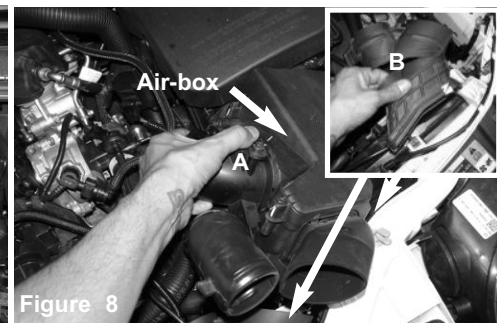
A) Lift up and carefully remove the stock air box. B) Now remove the rubber snorkel sleeve.
